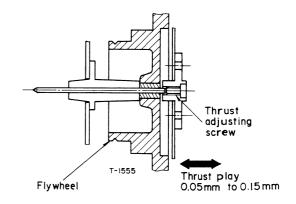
Capstan Ass'y Thrust Adjustment
